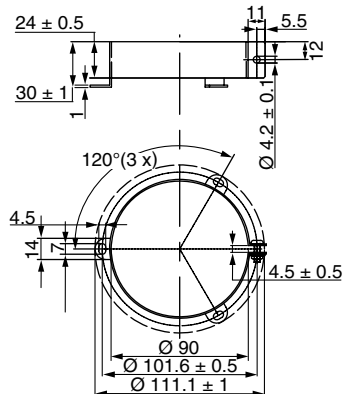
Dimensional outline of clamp for case $\varnothing D = 90 \text{ mm}$
